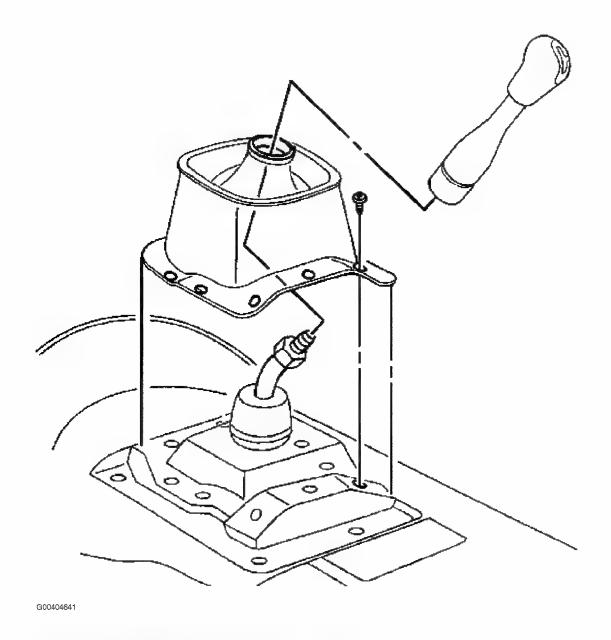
Removing/Installing Shift Lever Courtesy of GENERAL MOTORS CORP.
